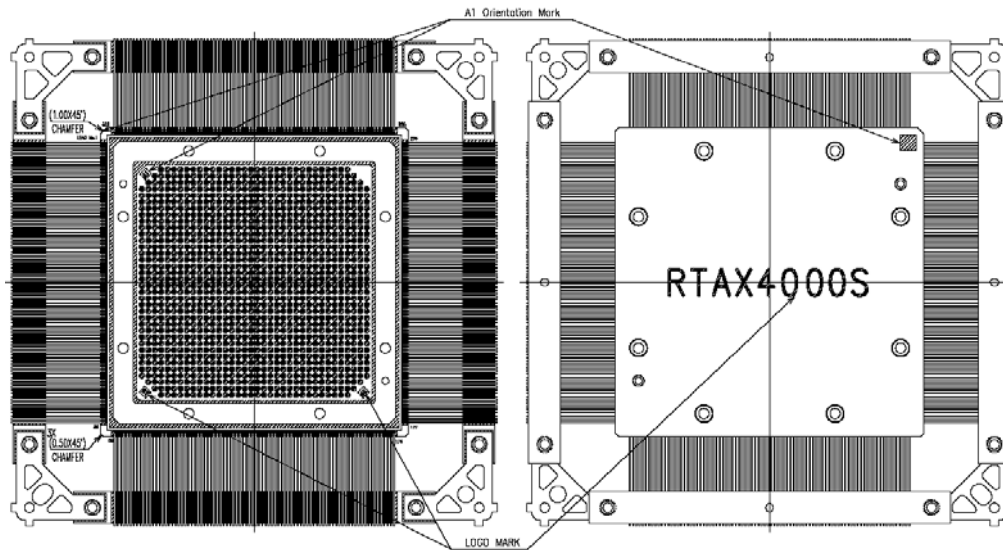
• RTAX4000S/SL CQ352 to LG1272 Ceramic Adapter: Top View, Bottom View, and Orientation Drawing
